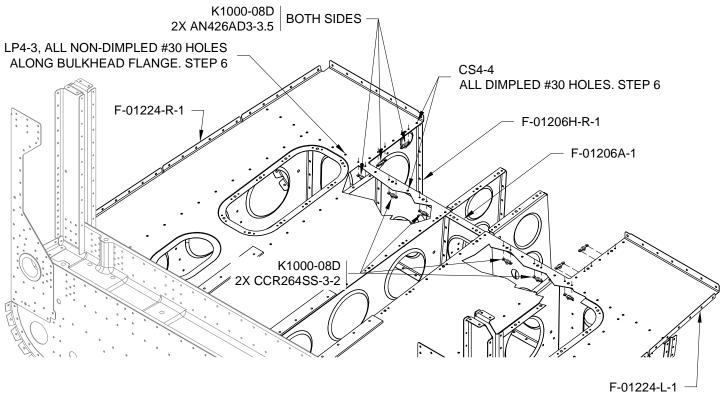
RIVETING NUTPLATES TO F-01224-L-1 & F-01224-R-1
